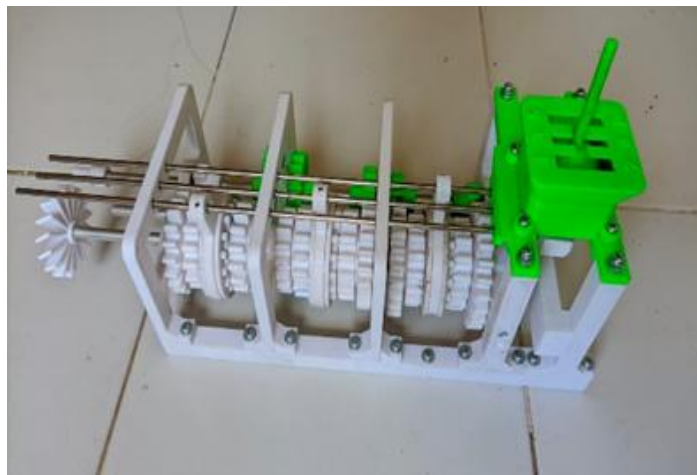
Prototype of the 6-speed transmission system fabricated using 3D printing technology.
